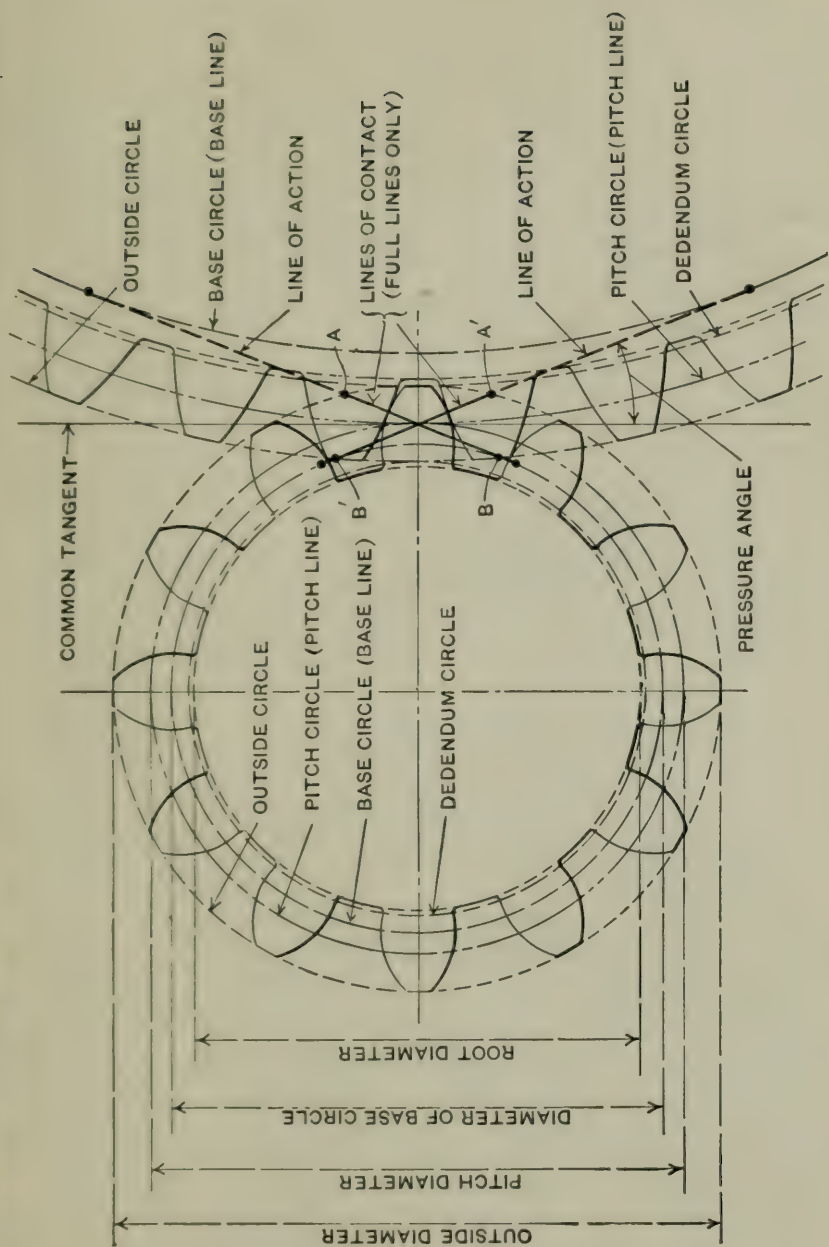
Diagram showing Definitions and Dimensions relating to Spur Gears.
